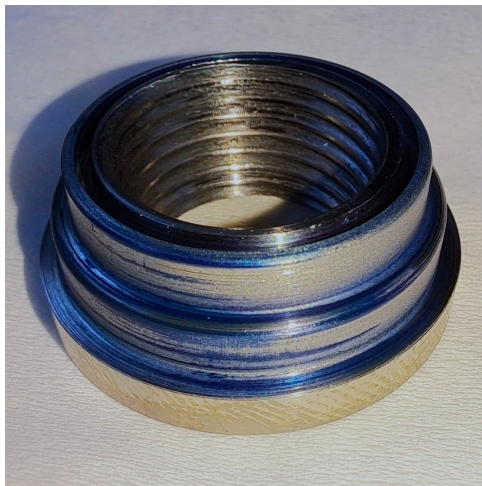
Assessing contact of the parts using engineer's blue, after lapping using the flange holding jig
